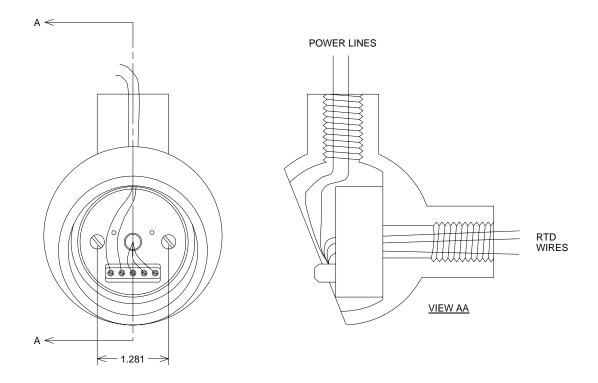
Assembly of the 18-812 Transmitter inside a connection head
